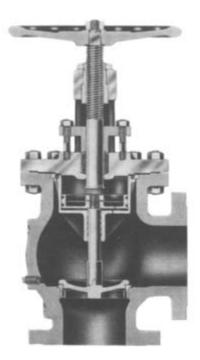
Angle valve. Courtesy of Jenkins Bros.
